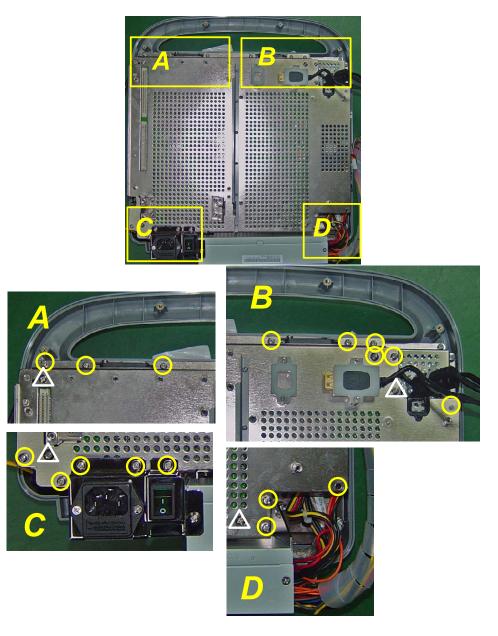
Remove the screws fastening the ultrasound metal shield
